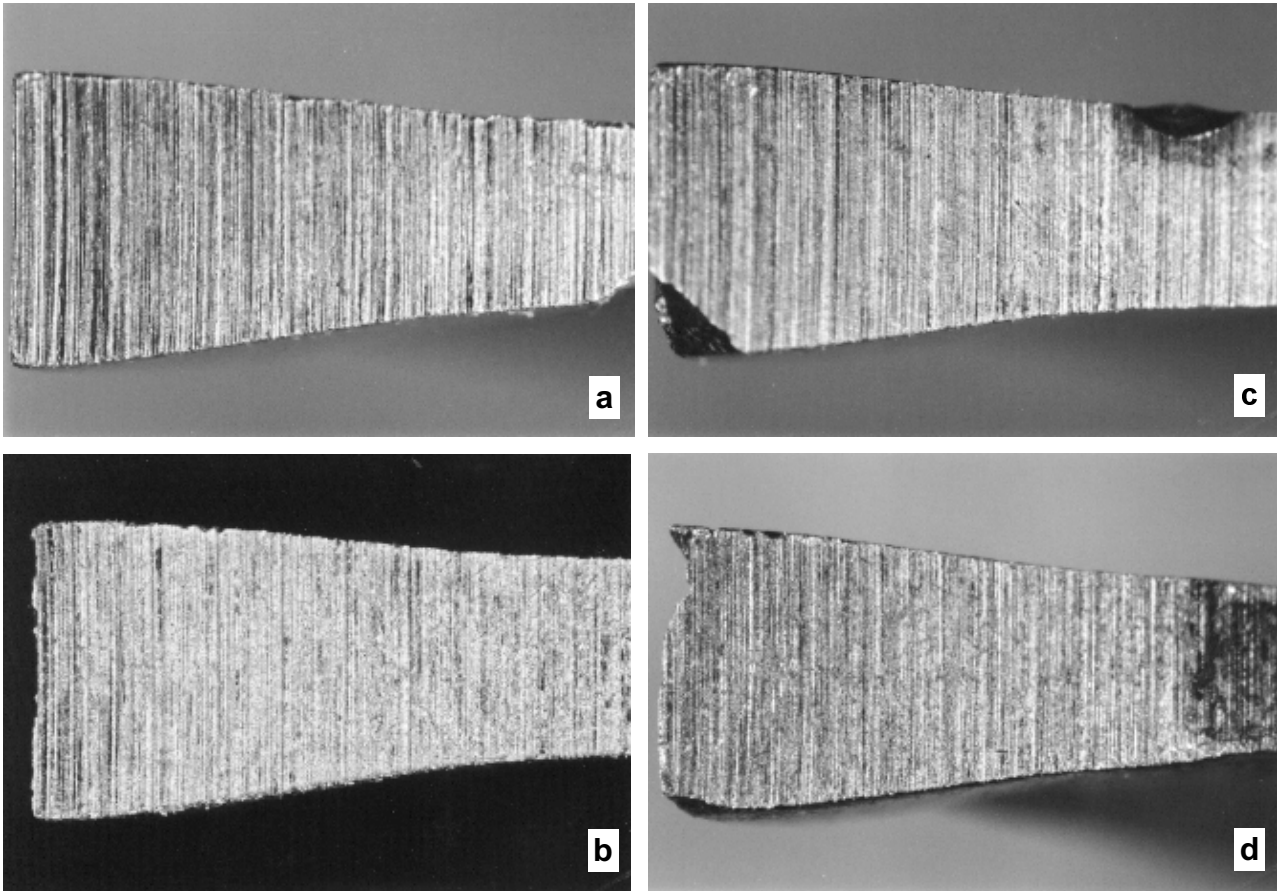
Four test teeth (30x): (a) Tooth 2 rake face ; (b) Tooth 6 rake face); (c) Tooth 3 rake face; (d) Tooth 7 rake face.
